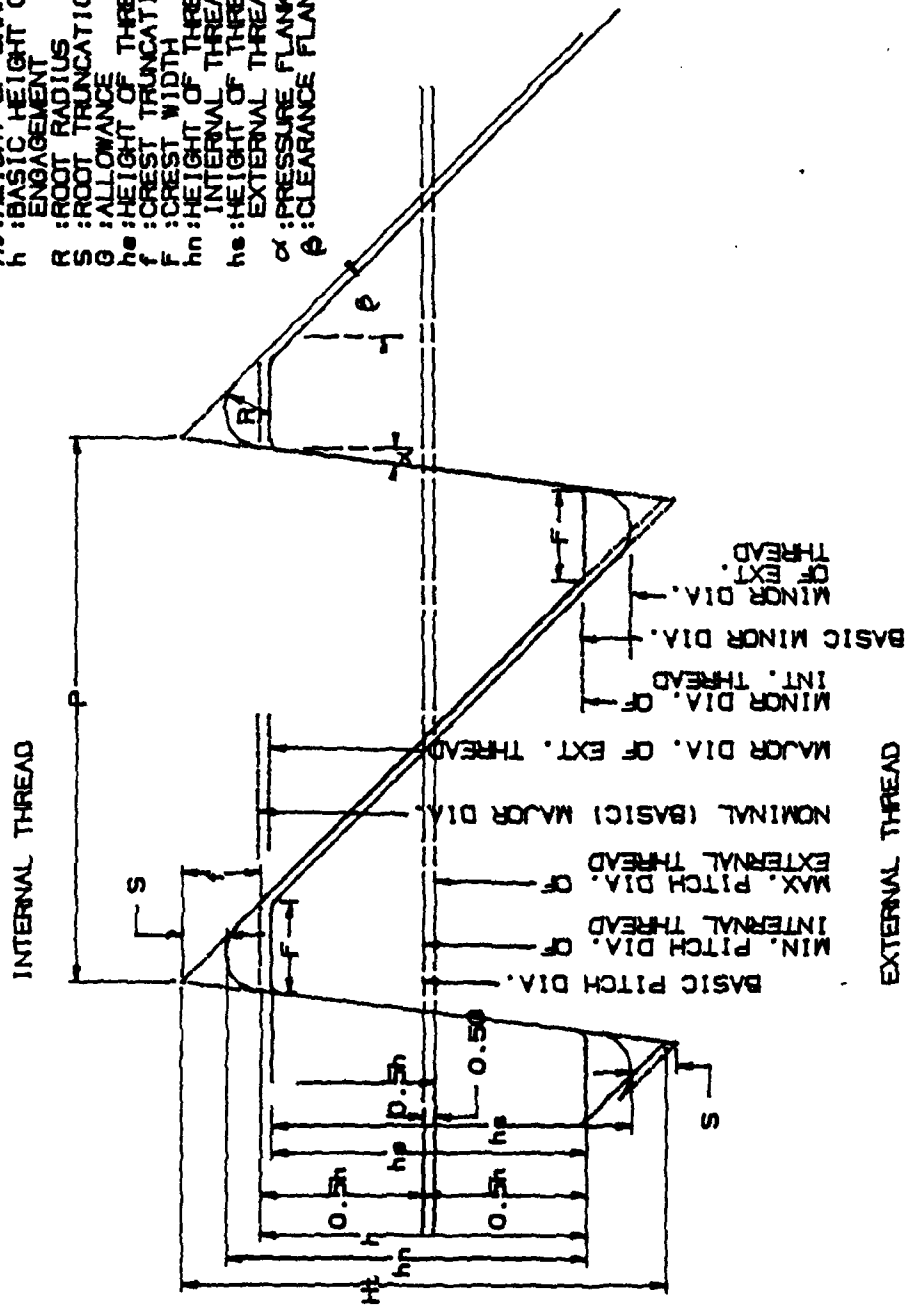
TYPICAL THREAD GEOMETRY.
